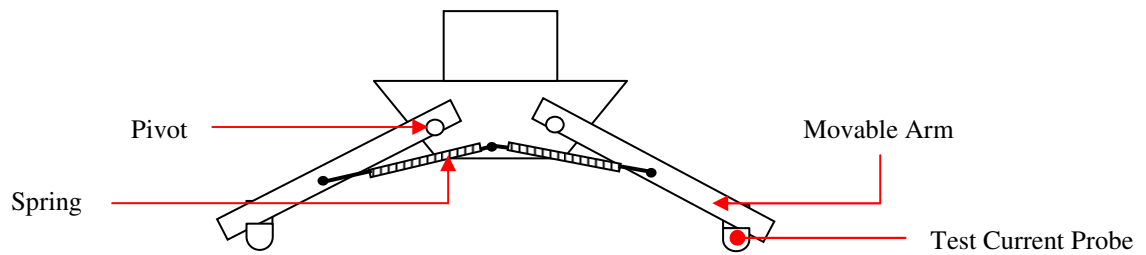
SKETCH OF MECHANICAL LINEAR SETUP [FRONT VIEW]
